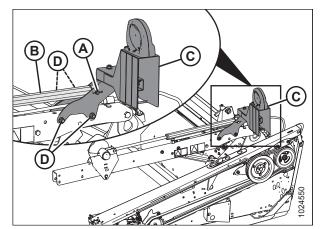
Left Reel Arm Cylinder in Aft Position
